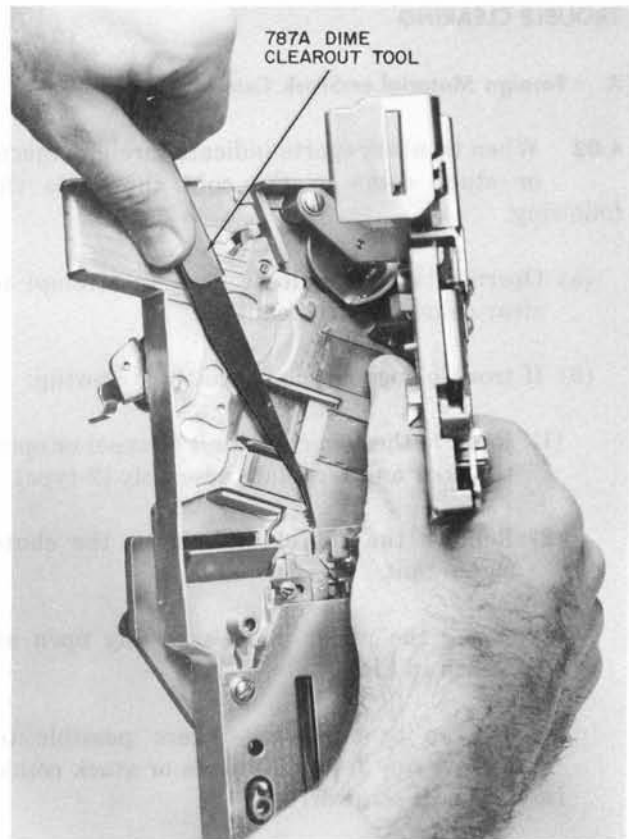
Using a 787A Dime Clearout Tool in Chute
